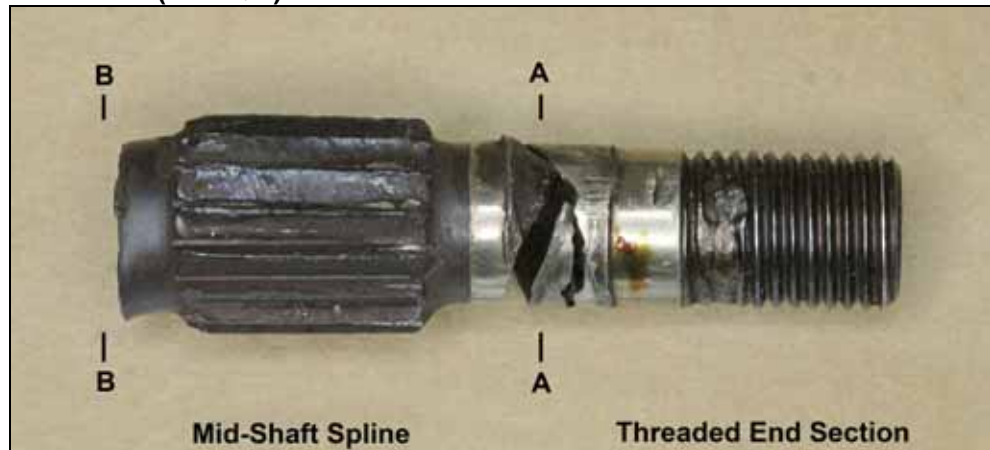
General view of the liberated mid-shaft spline gear and threaded end section of the tower shaft showing the location of both fractures.
